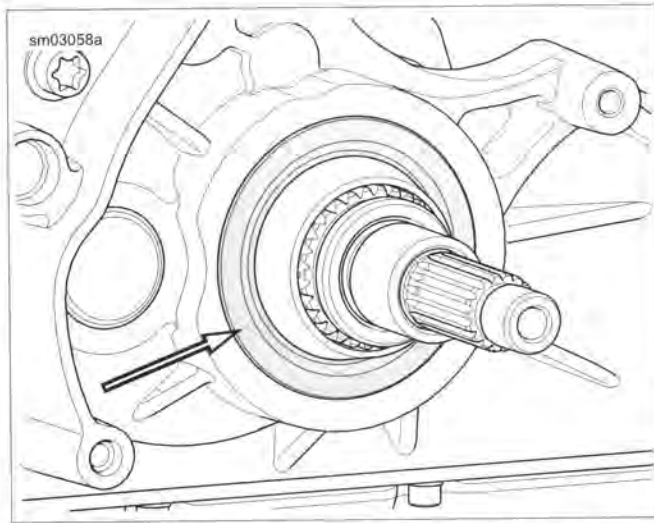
Place Main Drive Gear Seal Over Pilot
